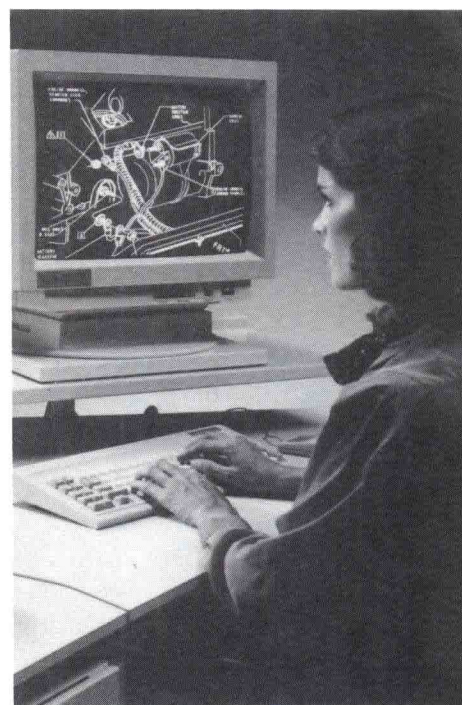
This technical illustrator is labeling the mounting parts for a starter of a car motor. (Datagraphic Systems)
